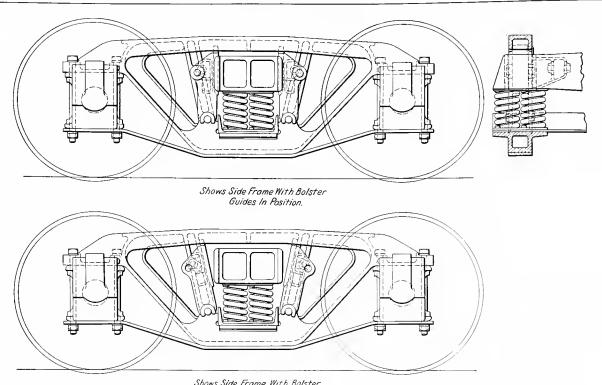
Freight Car Truck Side Frame Built of Rolled Steel Members Riveted Together. Murphy Equipment Company.
